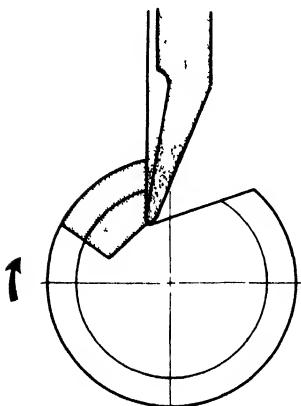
Advancing a Circular Forming Tool with Positive Back Rake for Grinding
